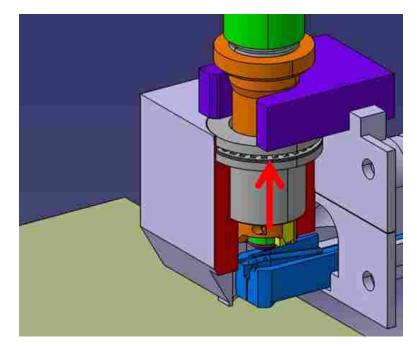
Driver and Flash Cutter Assembly Move up with Loaded Bit
